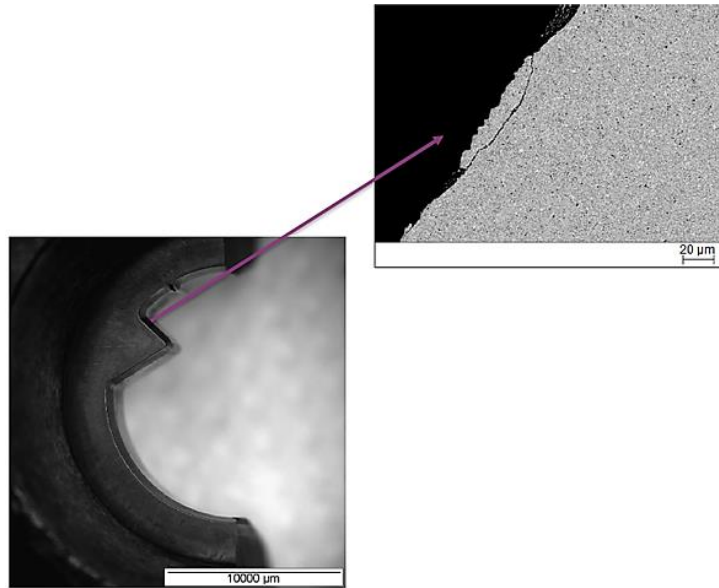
Fractures in the worn hardmetal die surface (upper angle)
